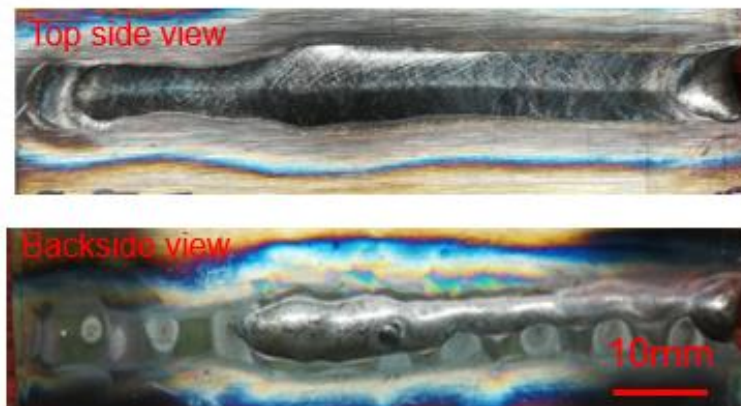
Topside view and backside view of weld bead with non-optimized PID gains
